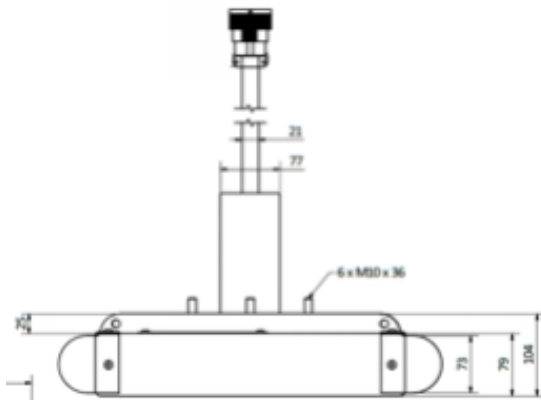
Technical drawing of the transducer head of the Innomar Medium 100 Sub Bottom Profiler.
